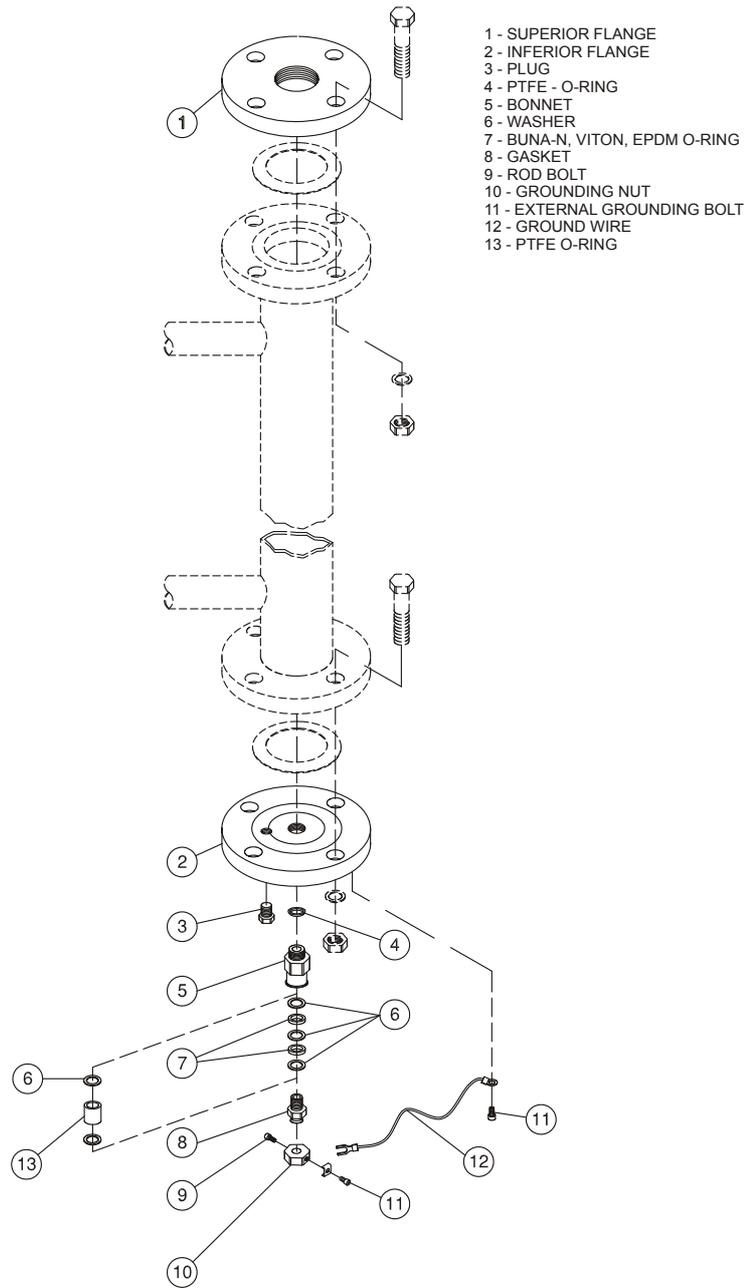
Exploded View – Accessories (Flange/Kit)
